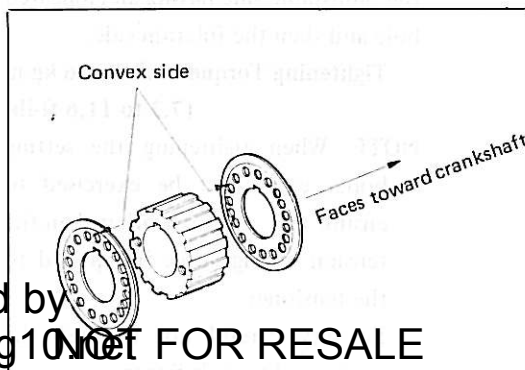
Installing Crankshaft Timing Belt Pulley Flanges
